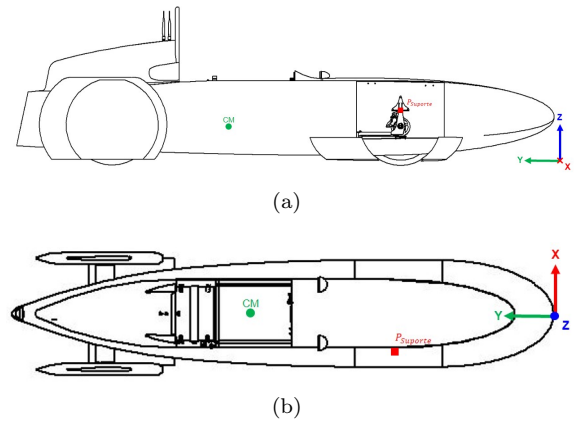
GP17 EVO prototype drawing view with center of mass and contact point (a) Lateral view (b) Top view
